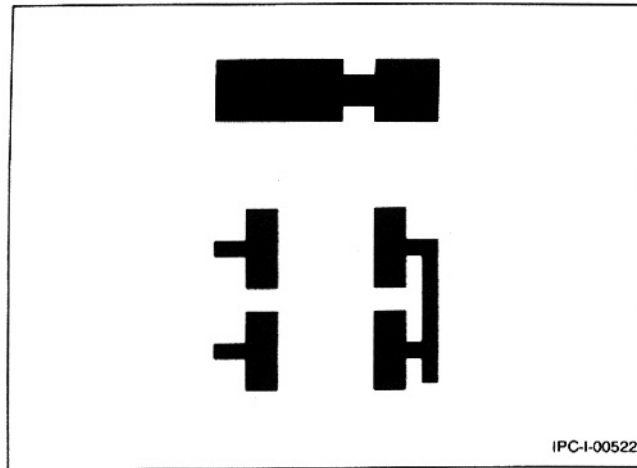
Solder lands for SMD components should be separated from heavy copper areas by narrow constrictions. Conductors should preferably leave the solder lands of one component symmetrically.
